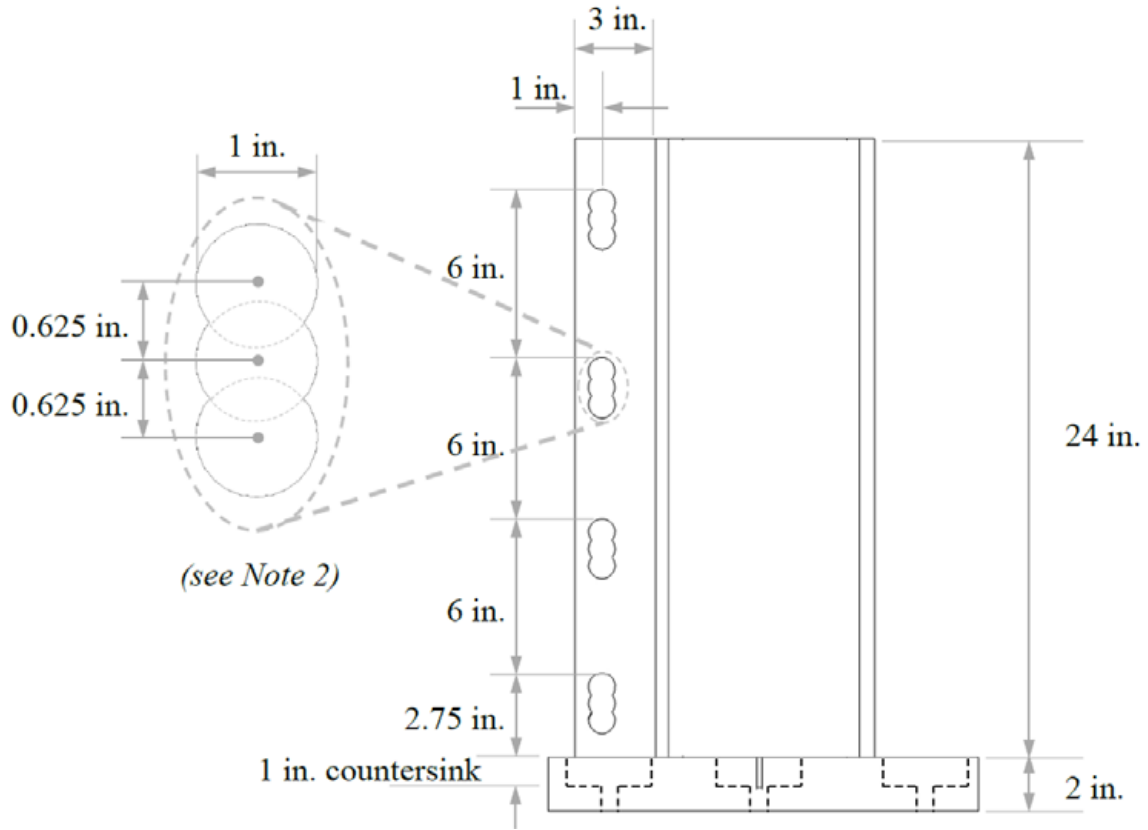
Profile view of Eccentric Shear base plate assembly dimensions
